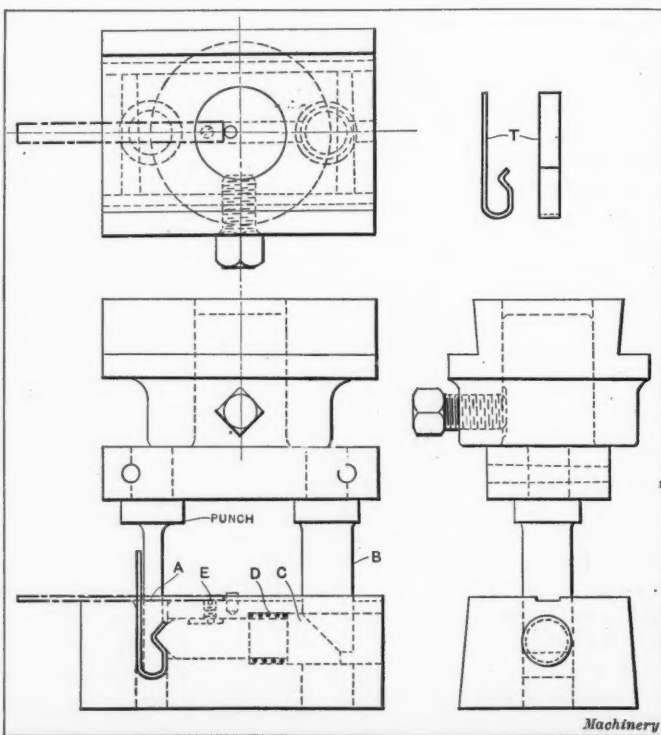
Forming Punch and Die used in a Power Press to make Piece T
